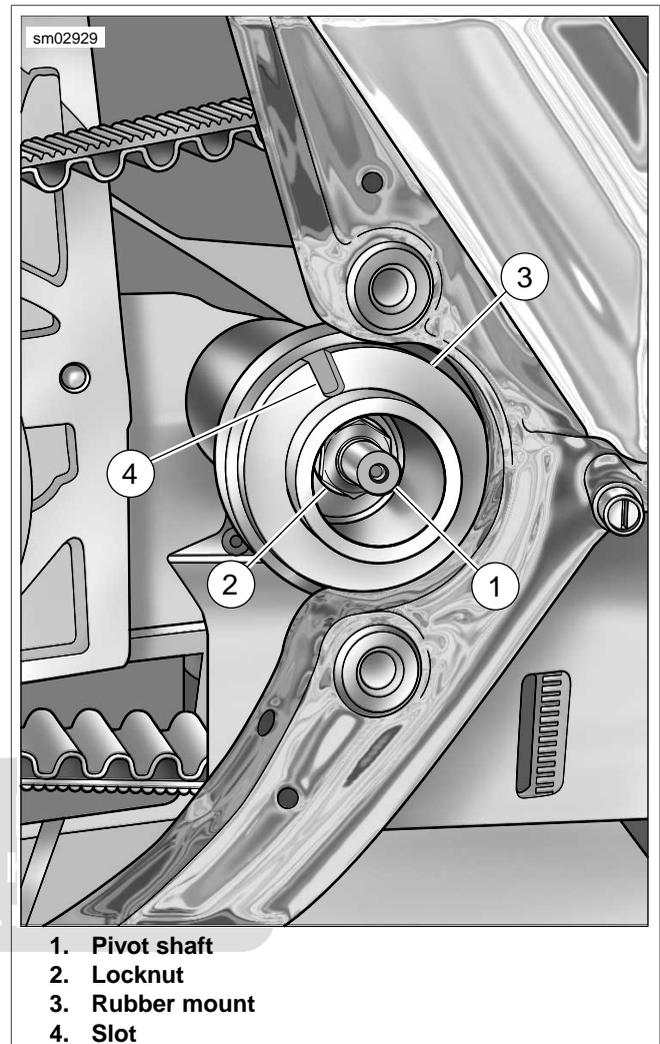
Remove Rear Swingarm Bracket (Left Side View)
